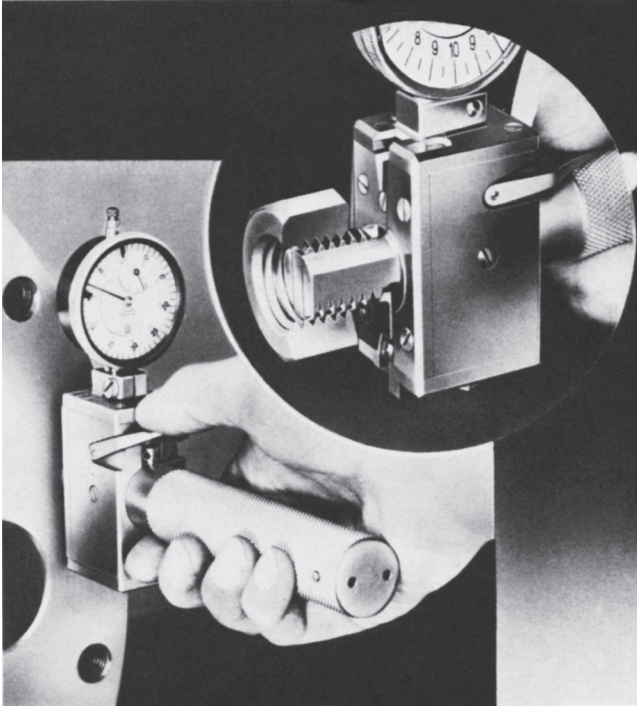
Using the indicating thread plug gage (Courtesy Mahr Federal Inc.).
